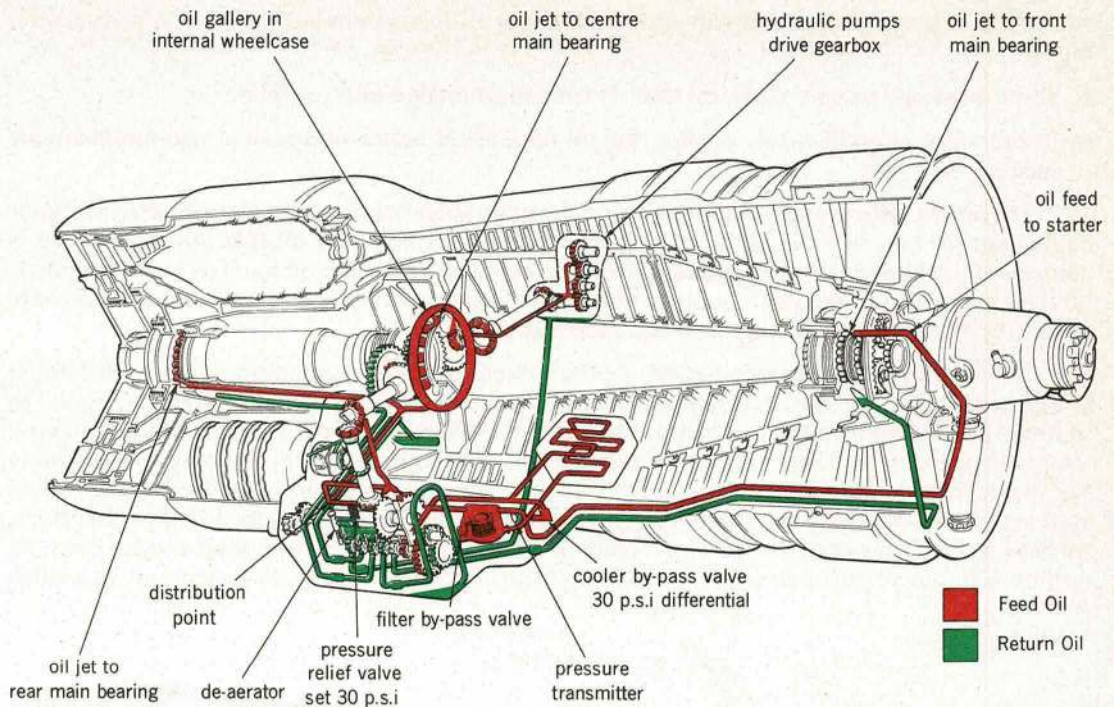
A turbo-jet engine oil system (pressure relief valve type)
